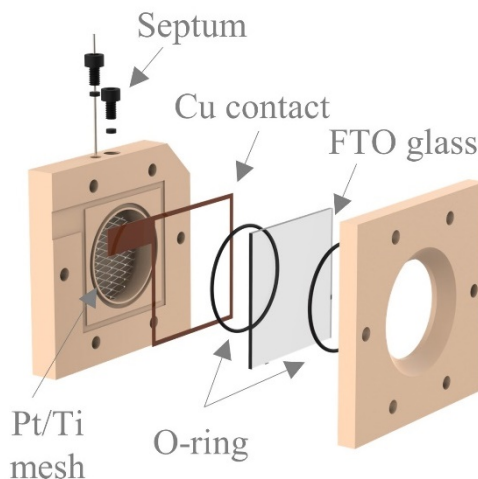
3D exploded view of the custom-made one compartment cell.
